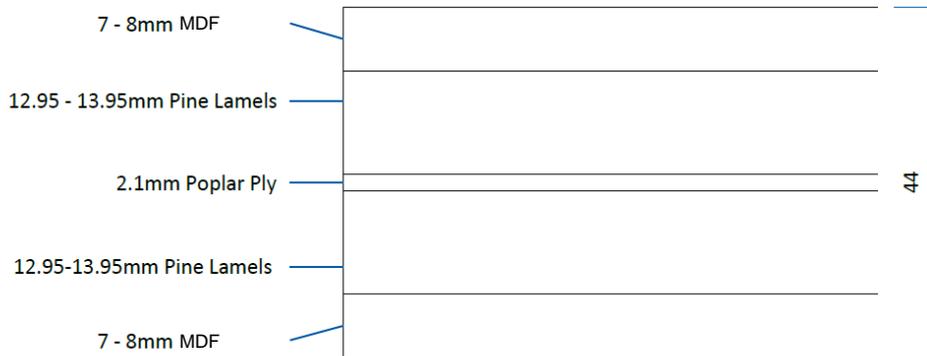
Cross section through Stredor 44 ply faced door blank design
